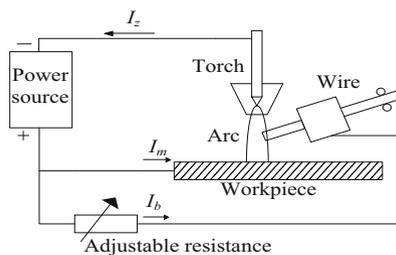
Principle of bypass coupling micro plasma welding
